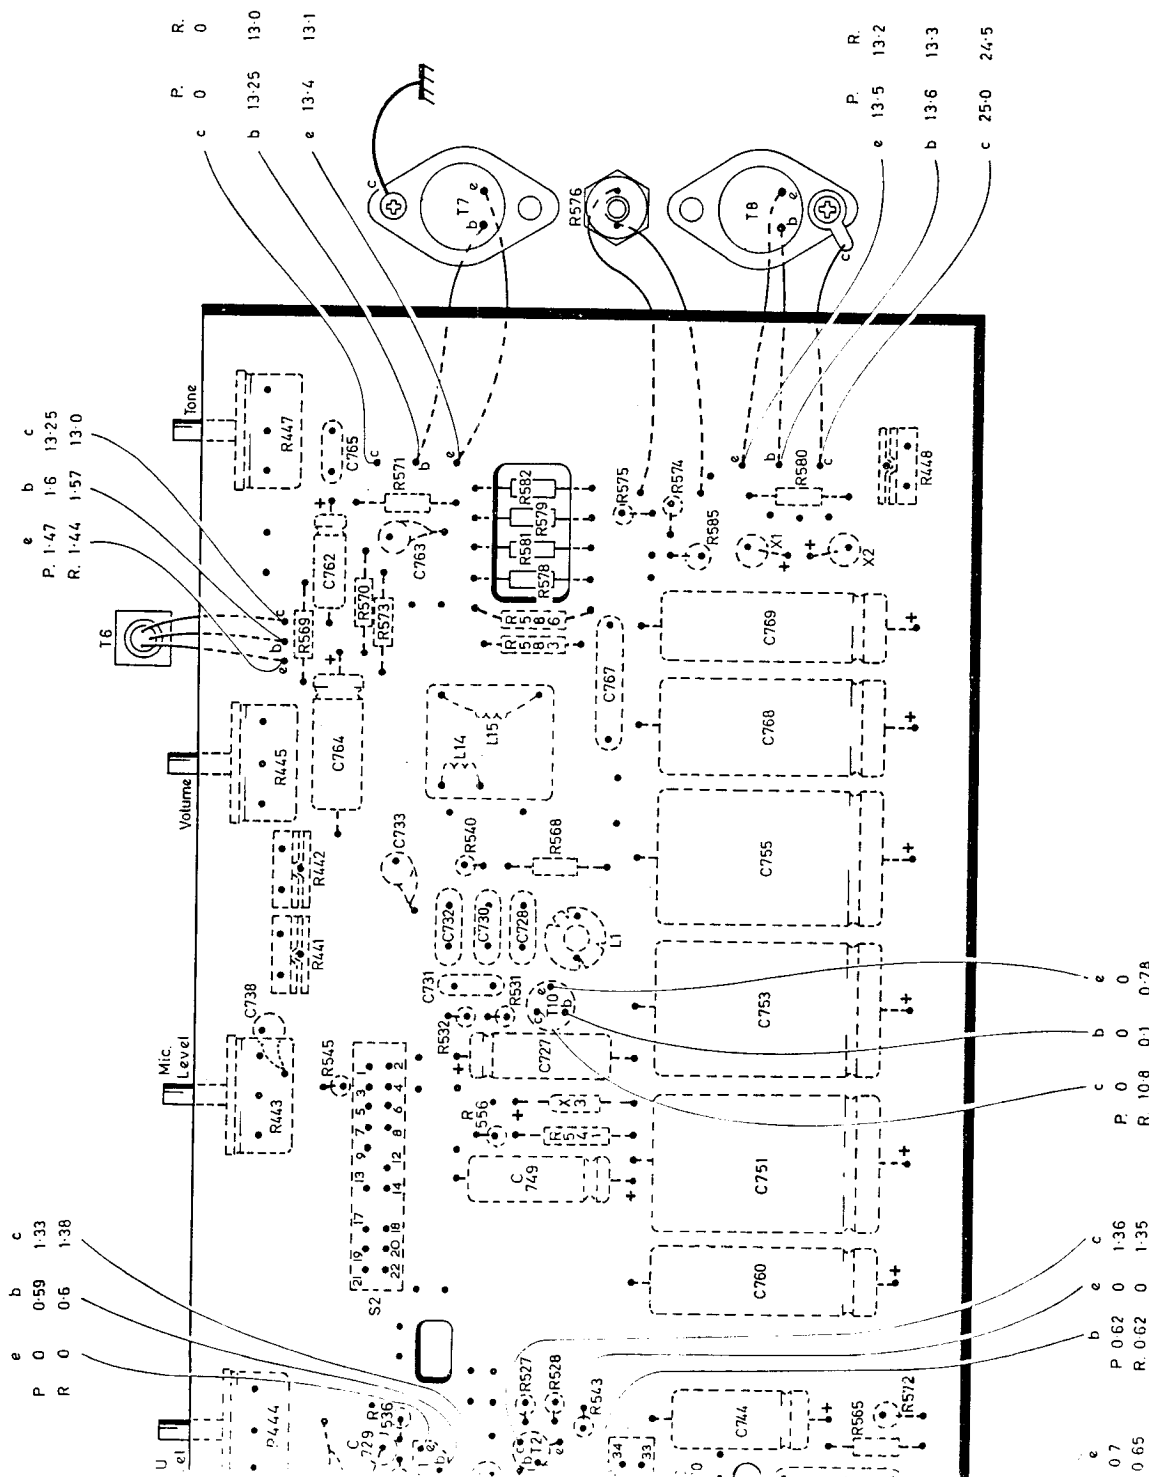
N4308 & ST9123A — PRINTED PANEL and WIRING DIAGRAM
